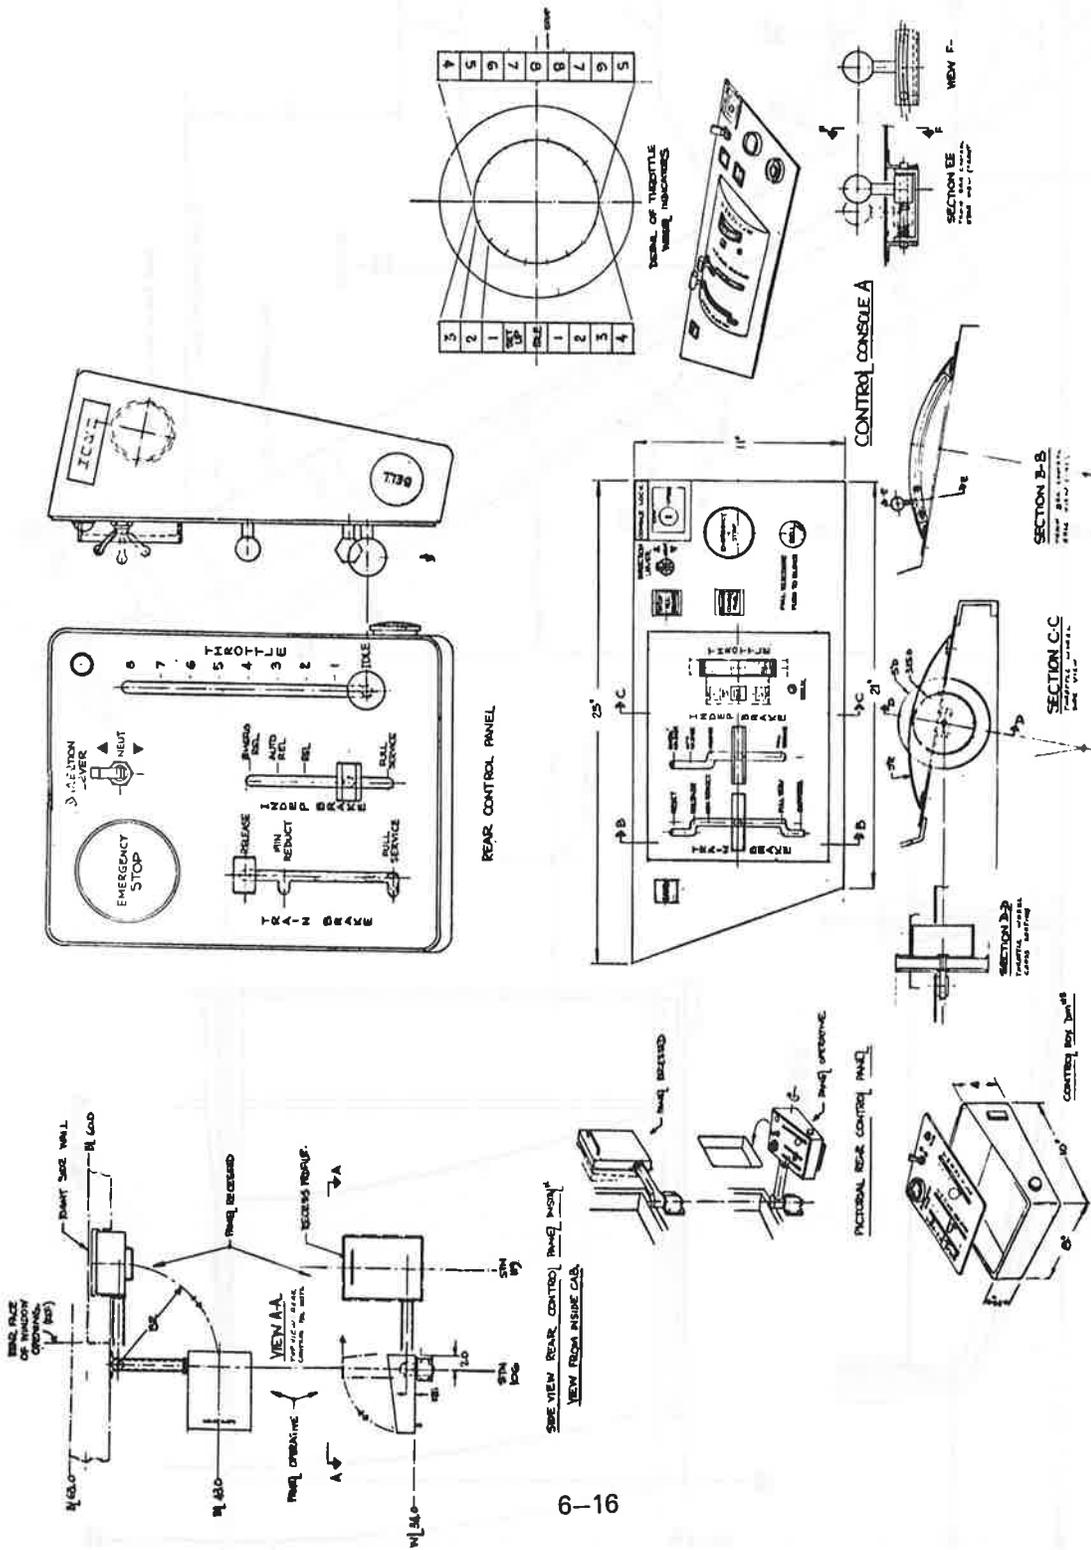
Mockup Details - Control Panels (Sheet 1 of 3)
